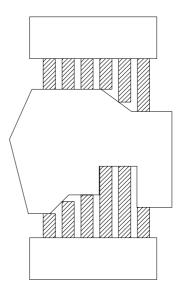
Pin-type reconfigurable fixture replacing the flat surface clamping.
